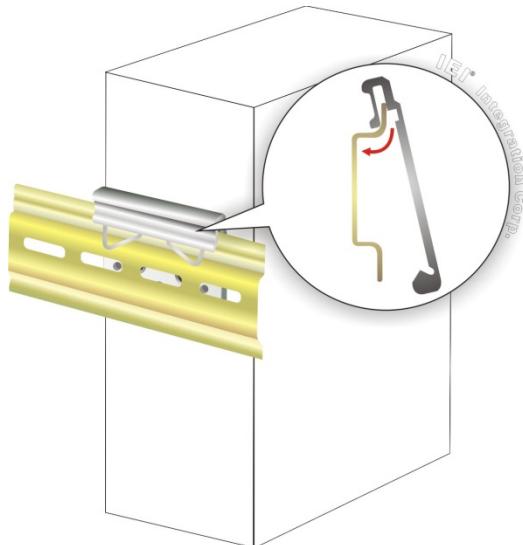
Attach the Mounting Bracket to the DIN Rail
